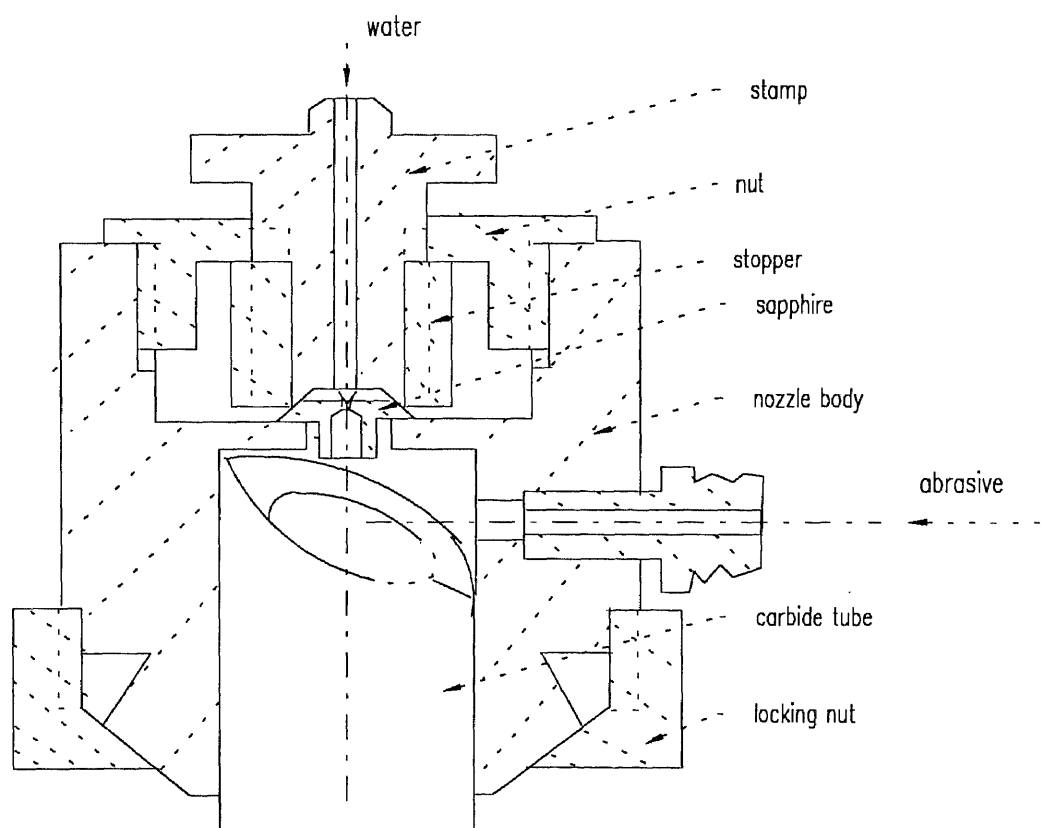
Schematic of the Improved AWJ Nozzle Assembly
